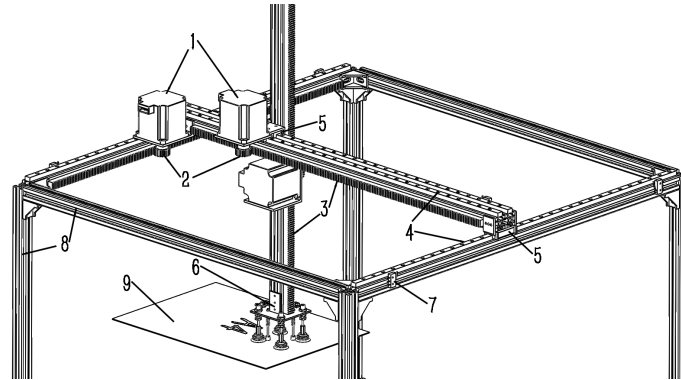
Assembly diagram of main parts of sorting robot. (1) Stepper motor, (2) Gear, (3) Rack, (4) Linear guide rail, (5) Slider, (6) Manipulator module, (7) Limit switch, (8) Aluminum profile, (9) Paper document
